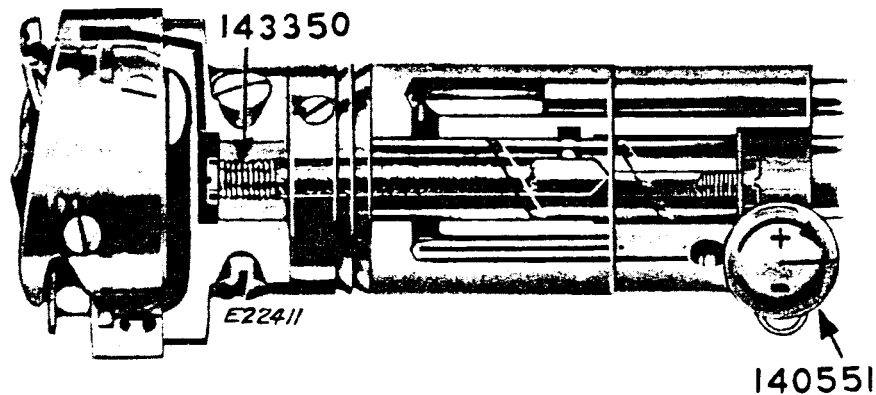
Oil Flow Regulator in Hook Shaft Bushing
